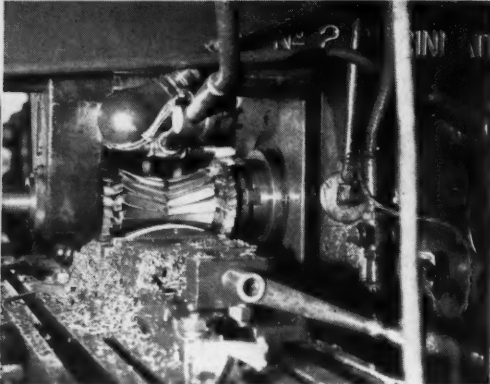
Milling Form on Mold Cap. The 6.230-In. Radius Must Be Accurate
